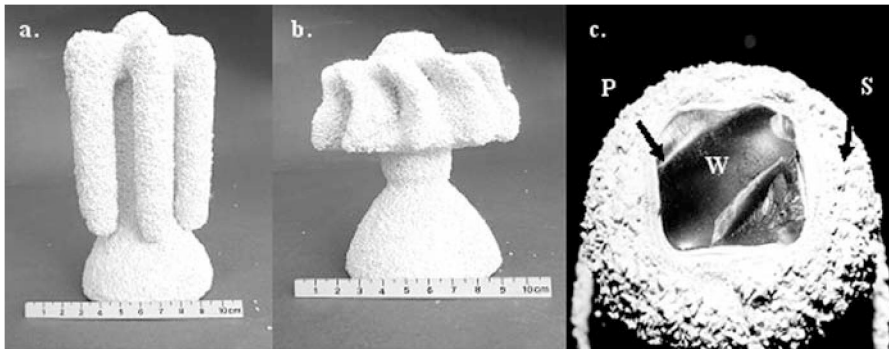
“Self-supporting” ceramic shell mold. (a) Tensile test specimens; (b) turbocharger wheel; (c) cross-section of ceramic mold P-primary coatings, S-secondary coatings, W-wax.
